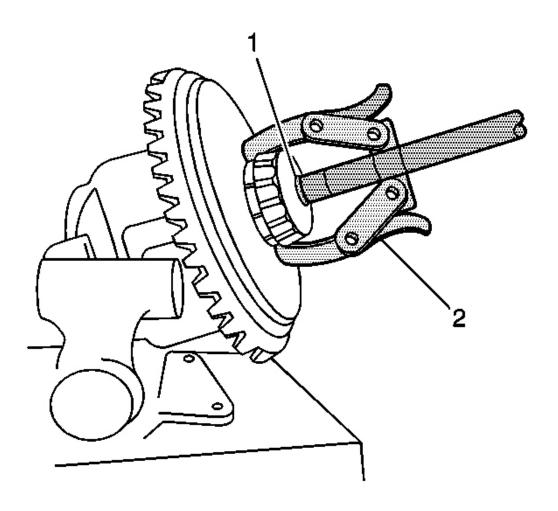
Removing Differential Side Bearing Courtesy of GENERAL MOTORS CORP.
